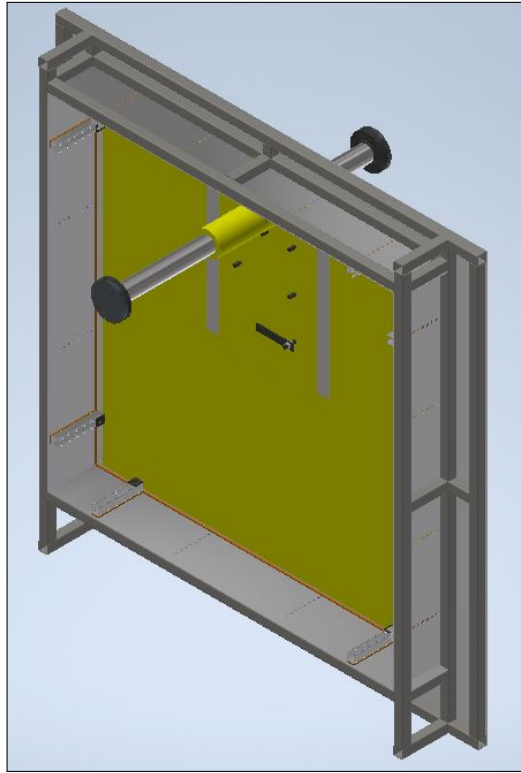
Navy bulkhead assembly shown with the test specimen mounted in the reversed position with insulation on the unexposed side (not used in this research)
